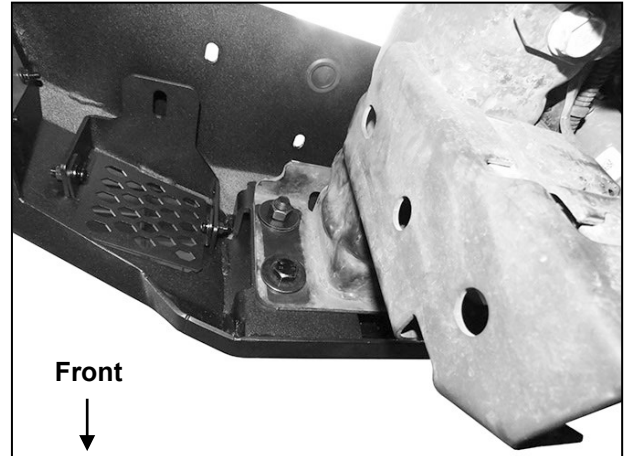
12mm Bolt/Nut Plate installed on back of driver/left side of Bumper. Thread Plastic Retainer onto Bolt Plate
